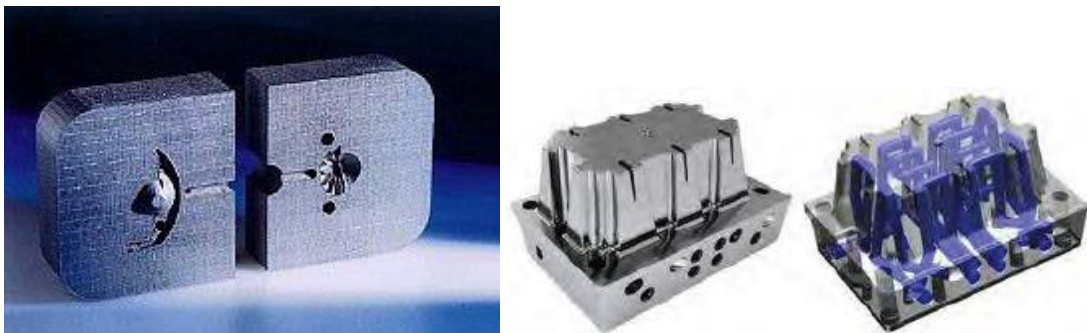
From left to right: mould insert produced by SLM (courtesy of MCP-HEK Tooling GmbH, Germany) [17]; moulding tool insert with conformal cooling (CAD rendering on the right), by HRSflow [6].
